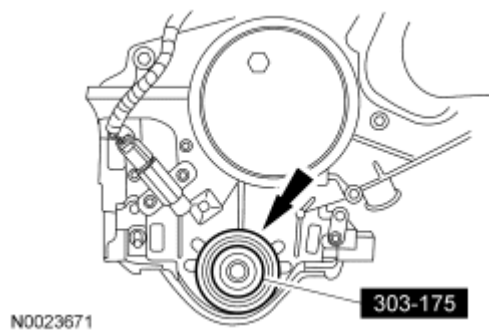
Installing Crankshaft Front Seal Using Special Tool (303-175)
